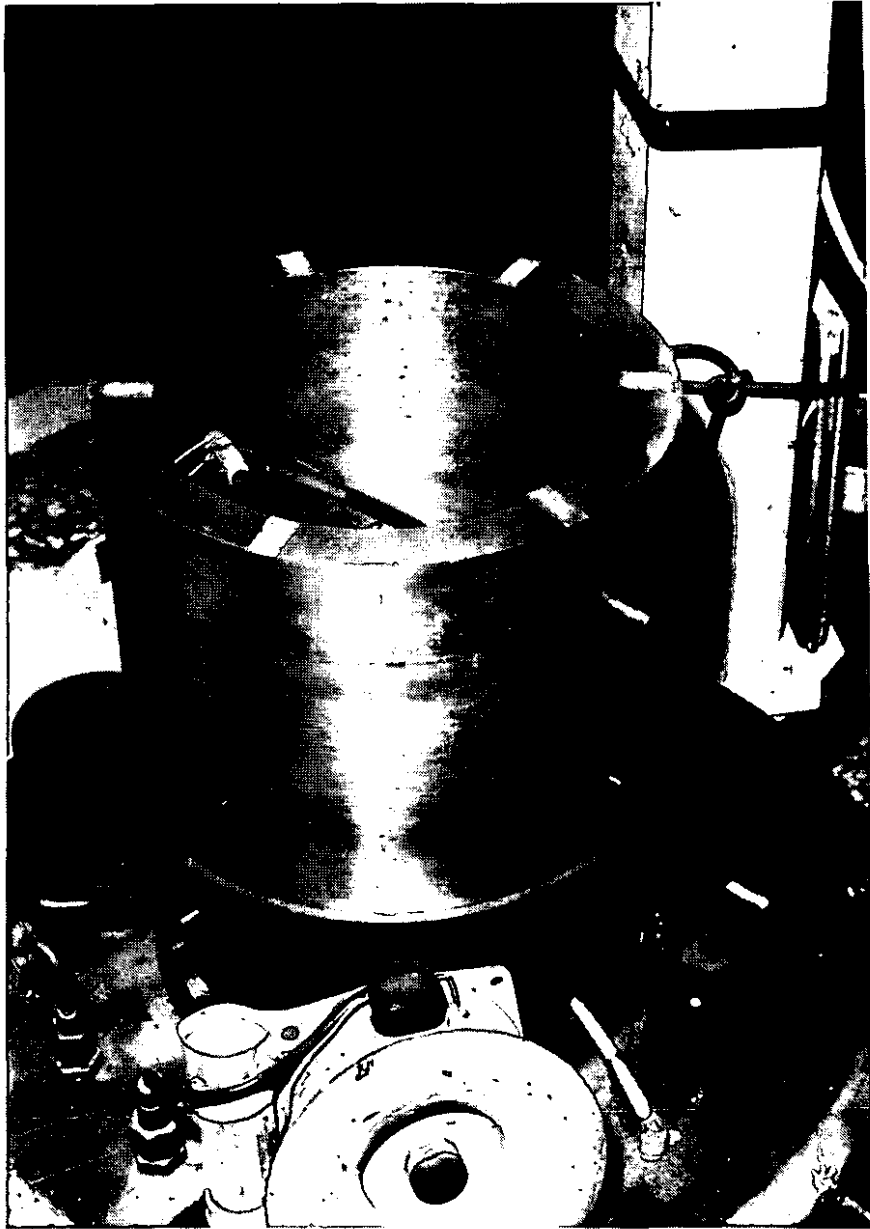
TEST VESSEL ASSEMBLED IN PRESS
